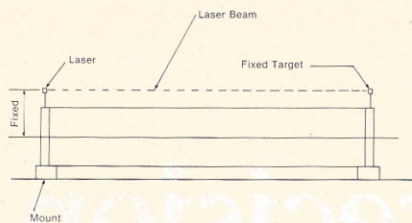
A laser provides a constant and precise datum line from which to base the movements of a precision X-Y indexer and the robot.
